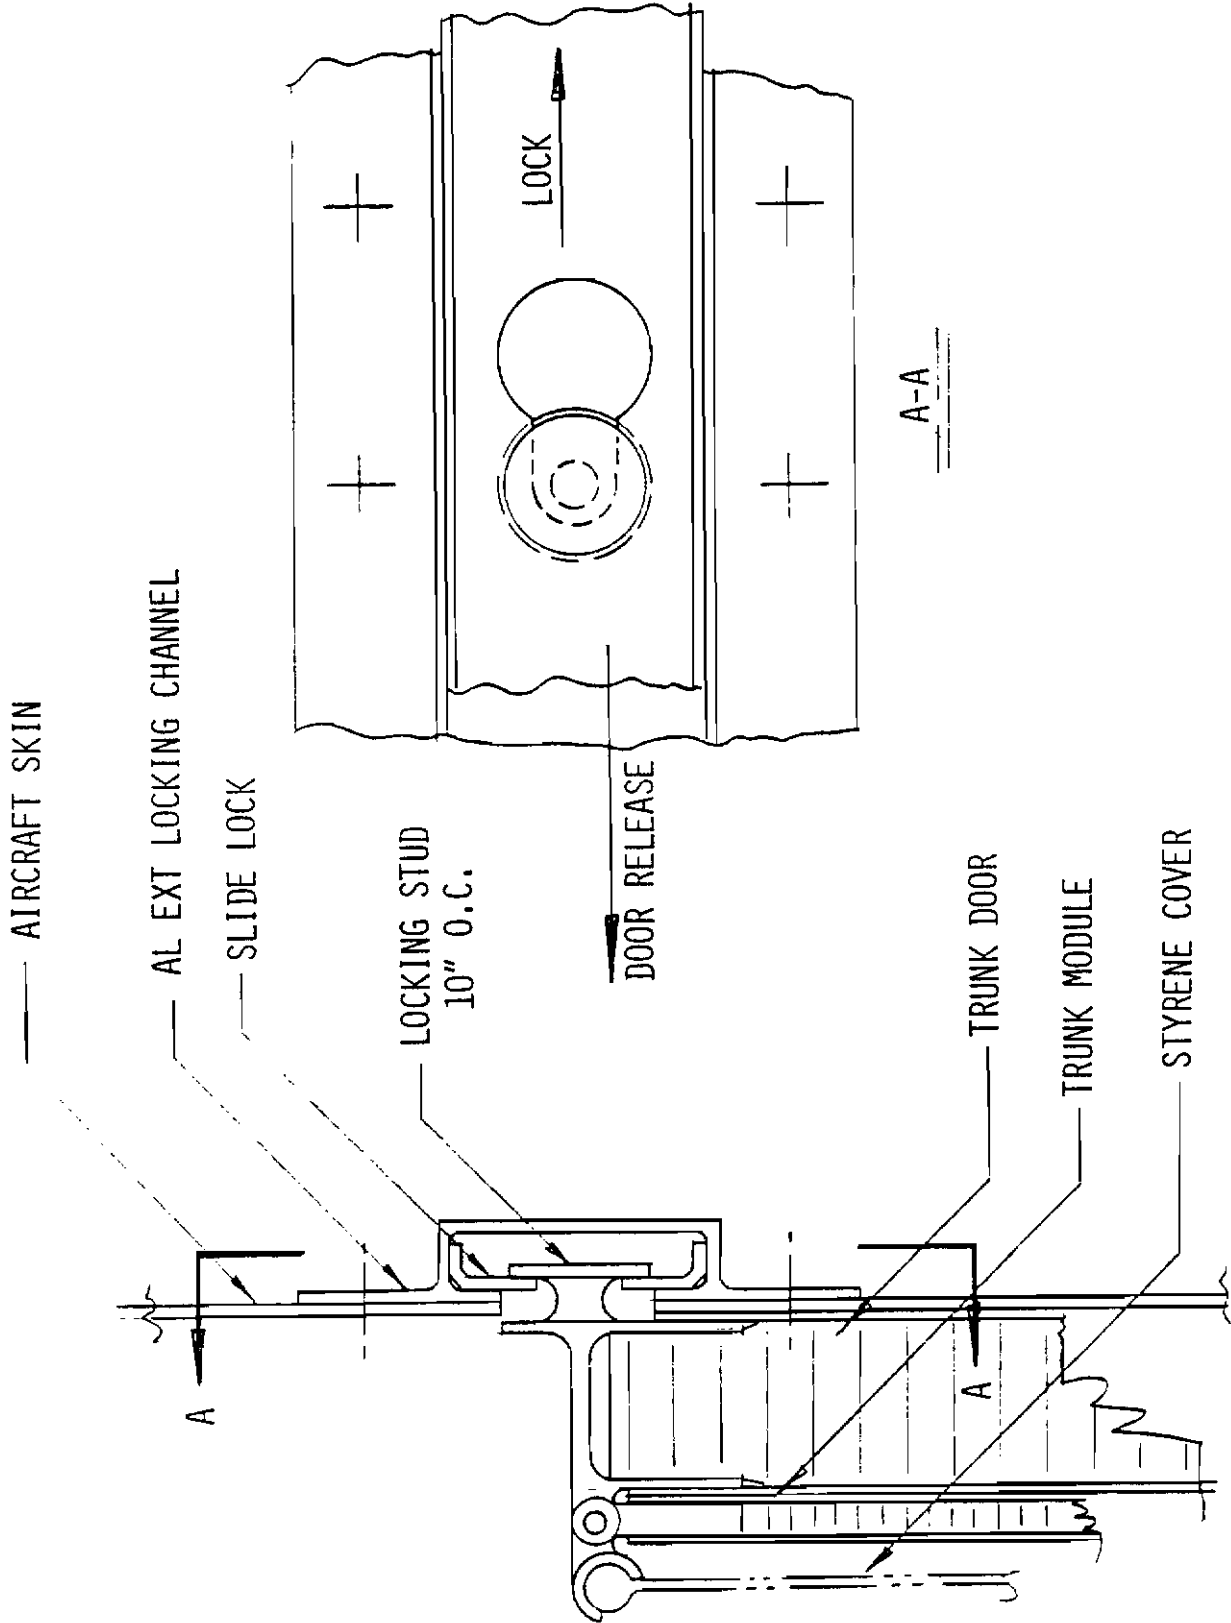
Rockwell ACRS Door Locking Mechanism Detail
